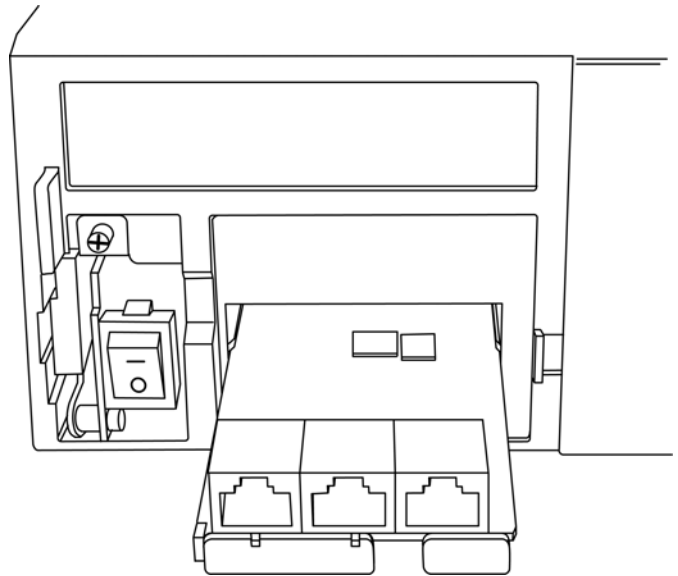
Installing PZ-BS10 Blade in Expansion Bay
